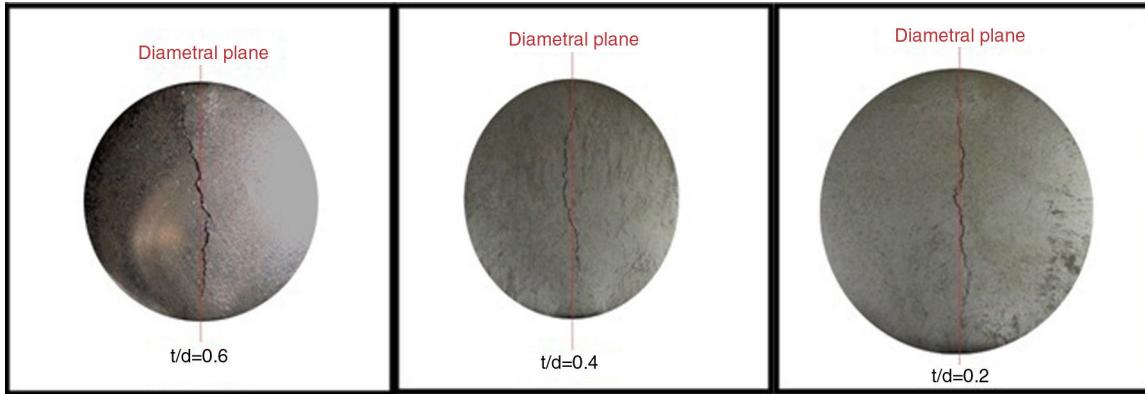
Crack developed in Flake Graphite cast iron specimens.
